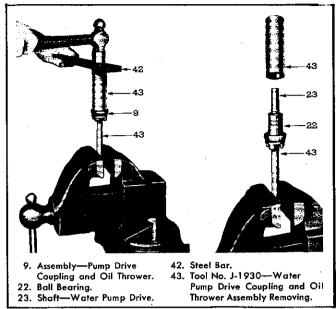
Removing Water Pump Drive Coupling from Impeller Shaft with Tool J-1930.
